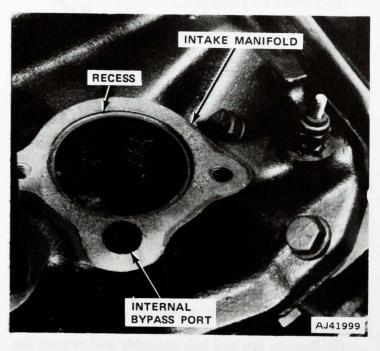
C-23 Thermostat Recess—Eight-Cylinder
